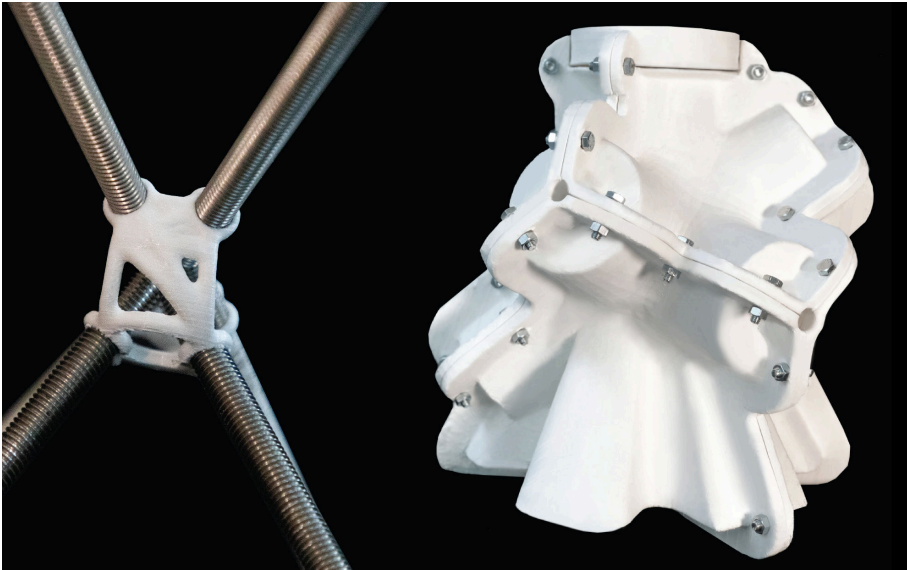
a) 3D printed fixture for an accurate welding process of the threaded rods which are placed within the node; b) 3D printed mould for a 6-axis node consisting of five assembled sub-parts which assure ease in demoulding process.
